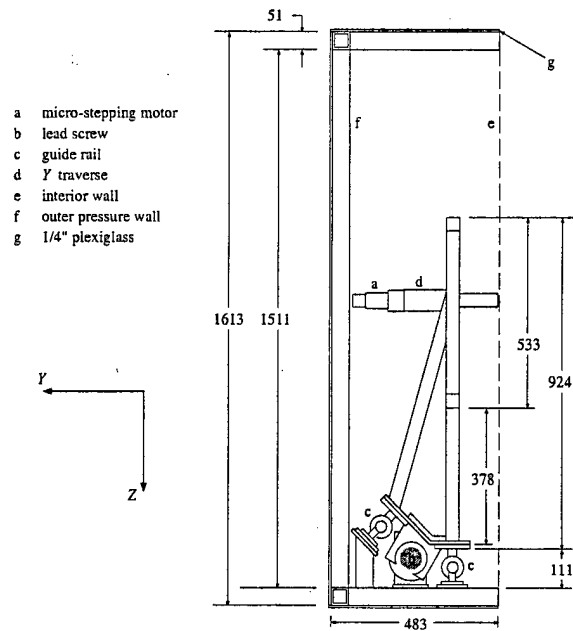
Side view of the traverse frame. All dimensions in millimeters.
